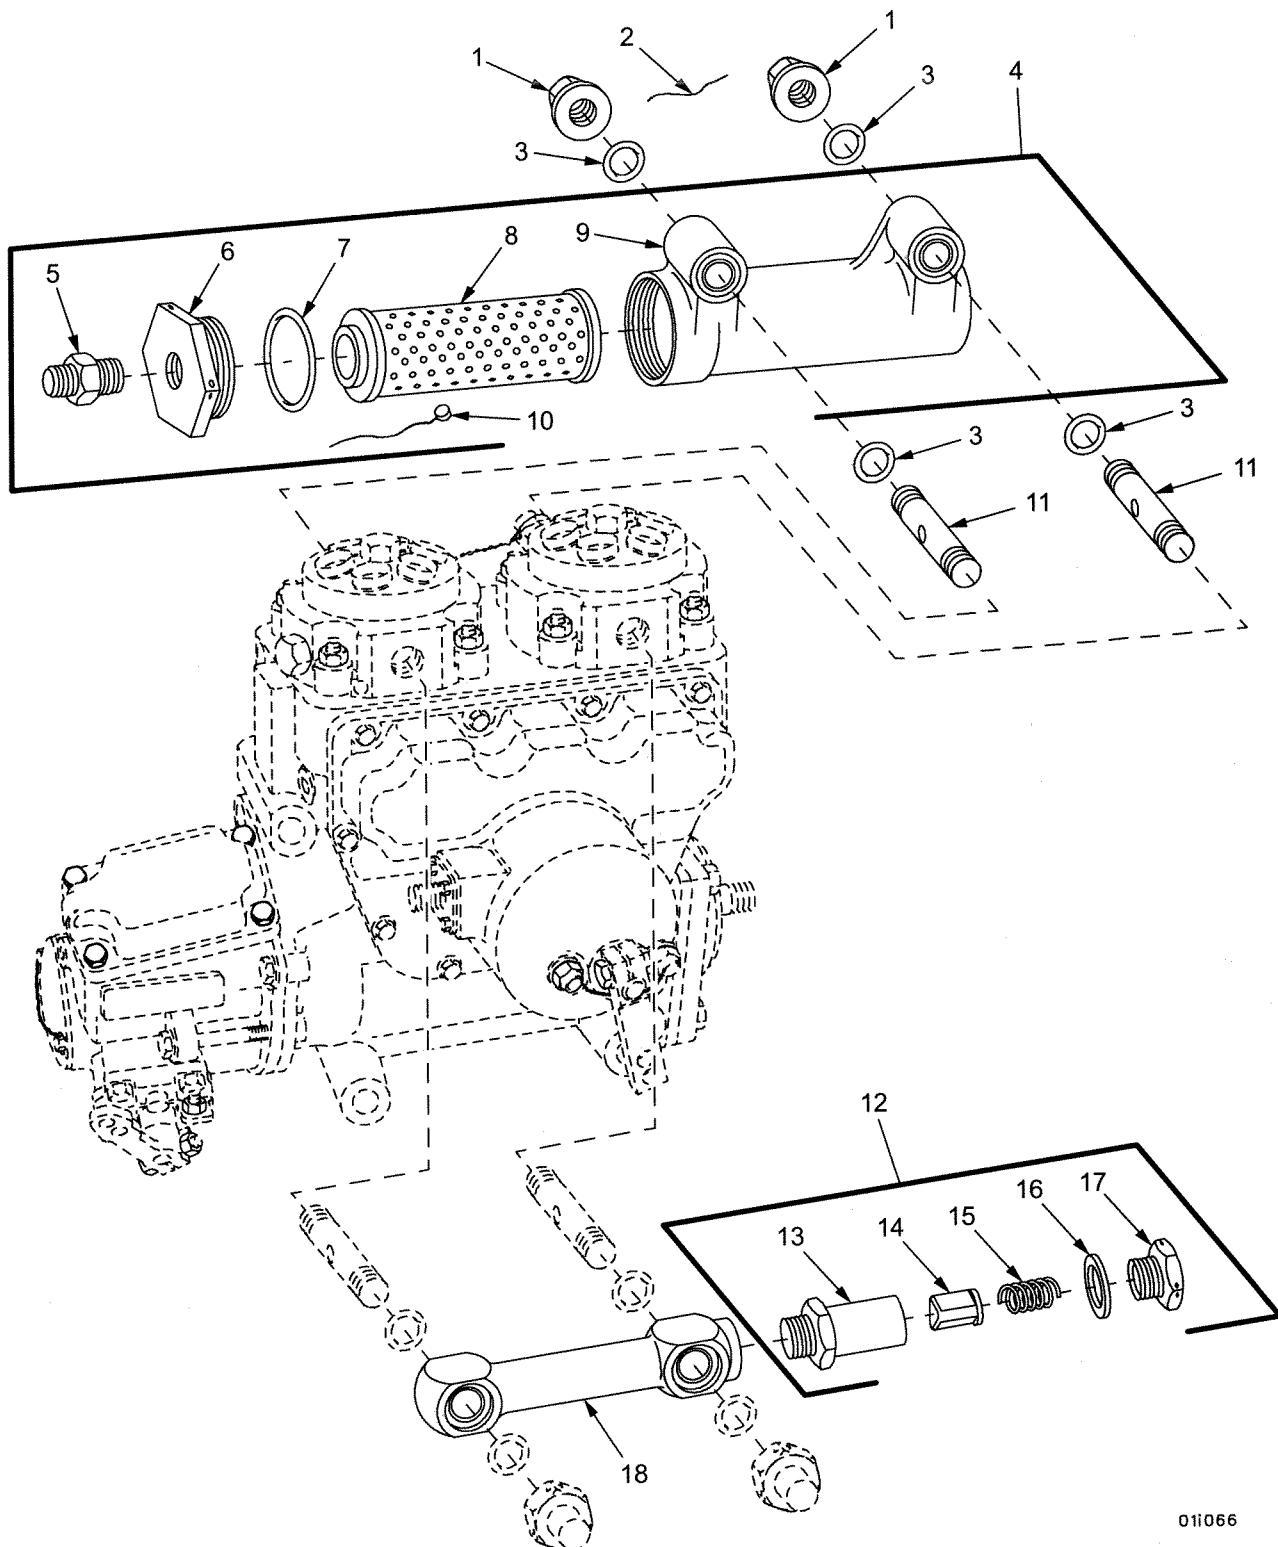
Bleeder Housing, Valve Assembly and Associated Parts.
